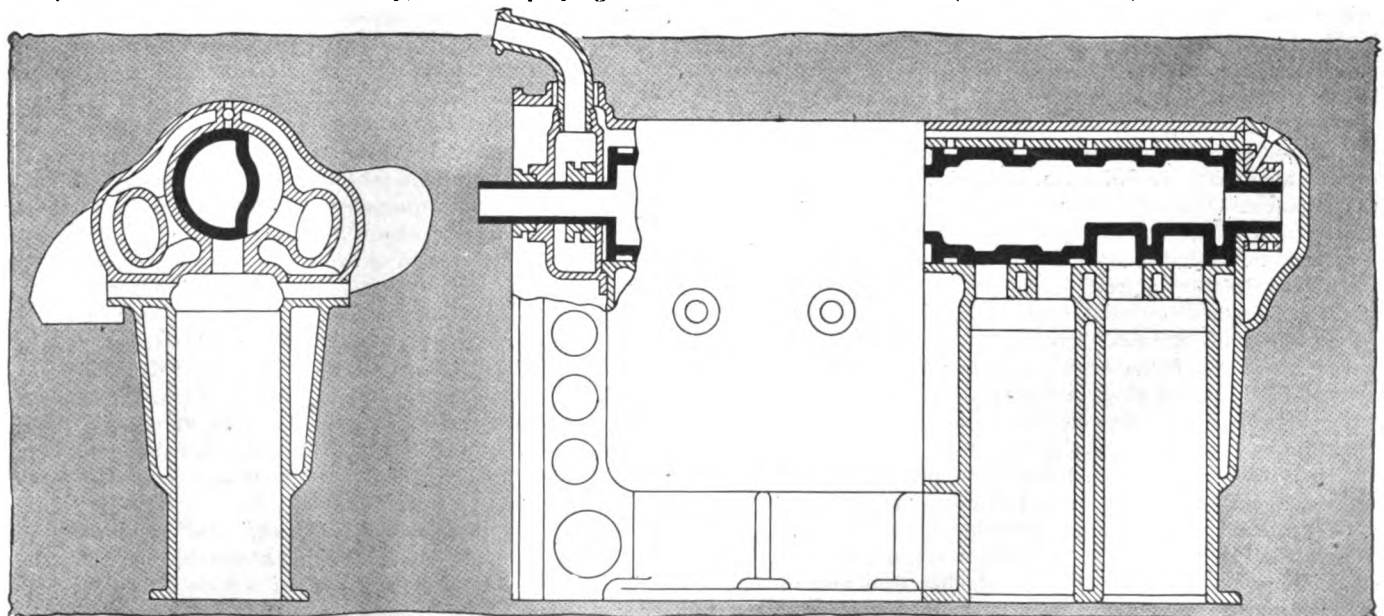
Walker rotary-valve motor in which the intake gases are drawn through the valve for cooling
